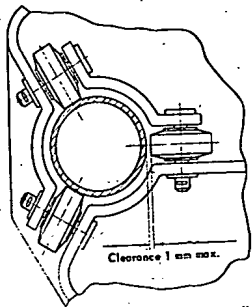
MEASURING CLEARANCE BETWEEN PULLEYS OF GUIDE SUPPORTS AND TUBULAR ROD
